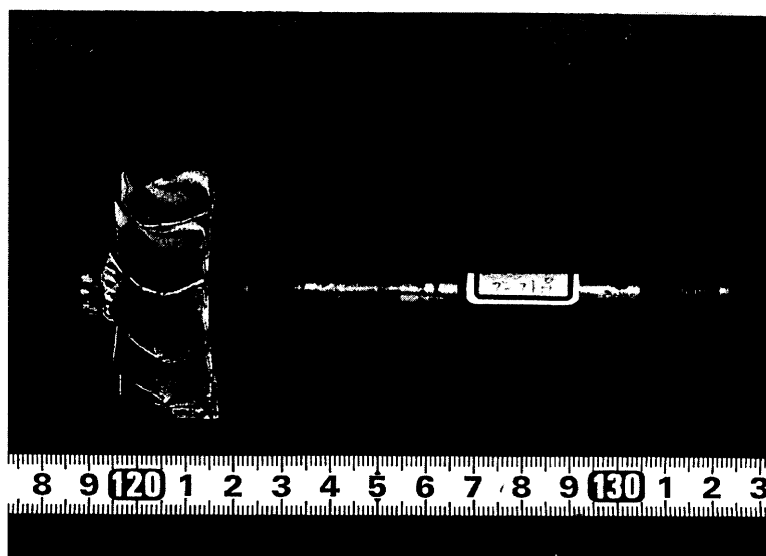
External appearance of TiAl turbine after gasoline engine endurance testing
